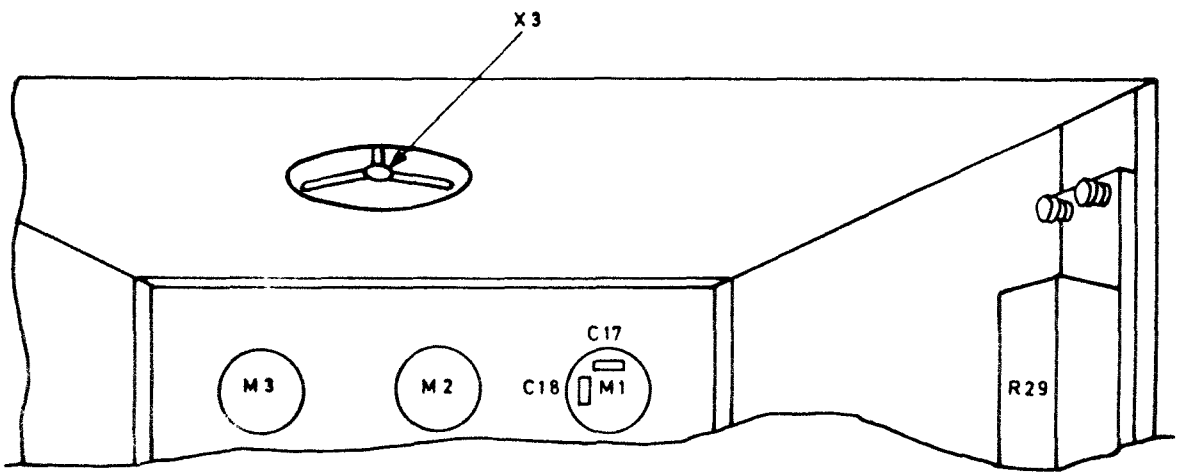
(a) PART VIEW OF R.C.U. SHOWING
